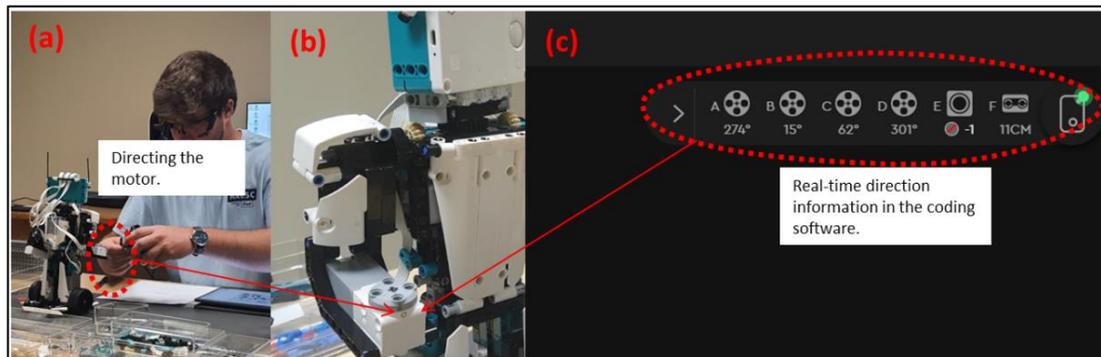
Manual assembly of the robot's claw. (a) Assembler directing the motor in the specified degrees. (b) Enlarged view of the arm's motor in the zero direction. (c) Real-time positioning data which the assembler monitors simultaneously in Mindstorms® software.
